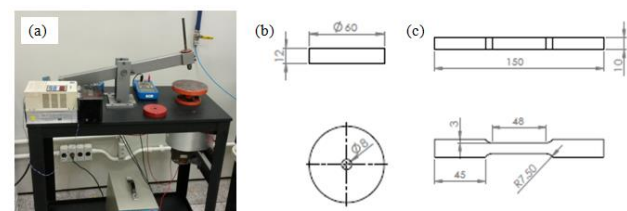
Tests implementation. a) Pin-on-disk equipment; b) Disk dimensions; c) Tensile test sample dimensions.
